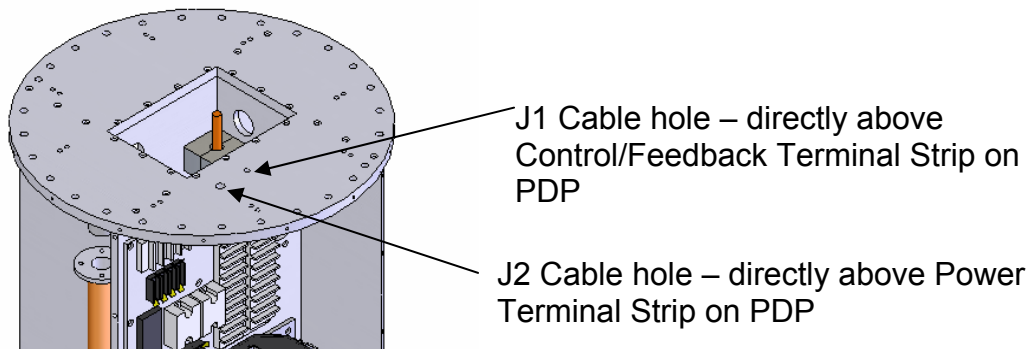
Connector Holes on RIGEX Experiment Top Plate
